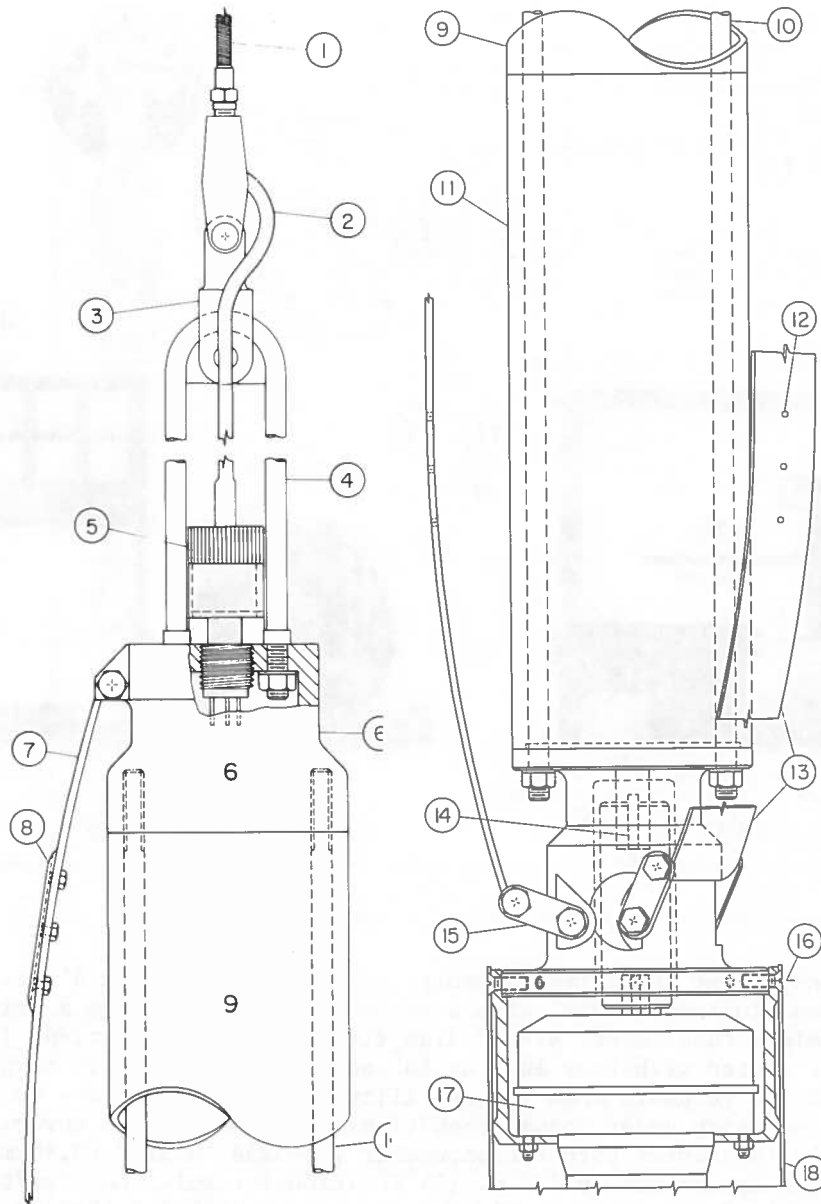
Core drill unit. (1) Electro-mechanical cable (Rochester Corp. cable number 7-H-325A). (2) Electrical lead from cable termination. (3) Clevice connection to top of U-bolt on drill frame. (4) U-bolt. (5) Envirocon plug (VMK-FS) and bulkhead connector (VSK-7-BCL) assembly. (6) Aluminum end cap. (7) Plate spring (0.52 cm x 3.81 cm x 93.3 cm); three with fixed or adjustable hasps. (8) Ice blade attachment (see Fig. 3). (9) Extension tube (11.43 cm ϕ x 47.3 cm). (10) Motor tie bolts. (11) Electric motor (Doerr Electric Corp., 1 HP, 1750 RPM, 180 V DC). (12) Holes for mounting ice blades. (13) Plate spring. (14) Keyed output shaft from motor, and gear box coupler. (15) Connecting link for spring attachment. (16) Screwed break point for drill dis-assembly. (17) Gear reducer (Sumitomo, cycloid drive, 17:1).
